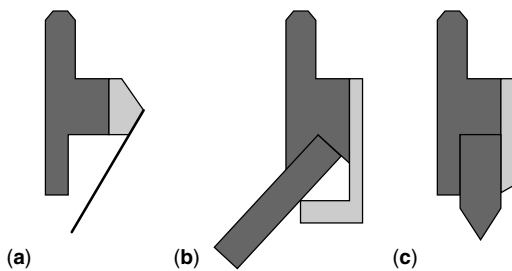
Examples of side view of squeegee fixture design: (a) metal squeegee, (b) polyurethane trailing edge, (c) polyurethane D-cut [20]
